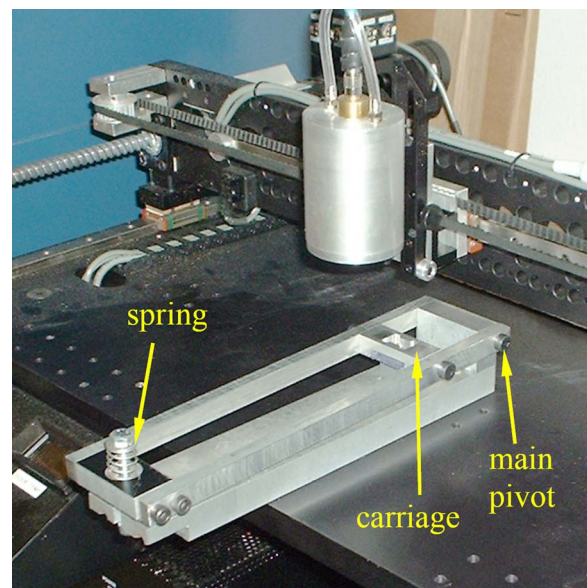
Laser welding fixture mounted to the welding table. The arms pivot at the far right of the fixture. The absorbing part is placed in a slot approximately 50 mm from the first pivot. The shims are placed on the absorptive part followed by the transmissive part, forming the T-joint geometry. The transmissive part is held in place by a rotating carriage, which is the second pivot on the pair of arms. On the far left side of the arms, a precision spring is set to a very low force to only maintain light contact between the parts and not to compress the shims.
